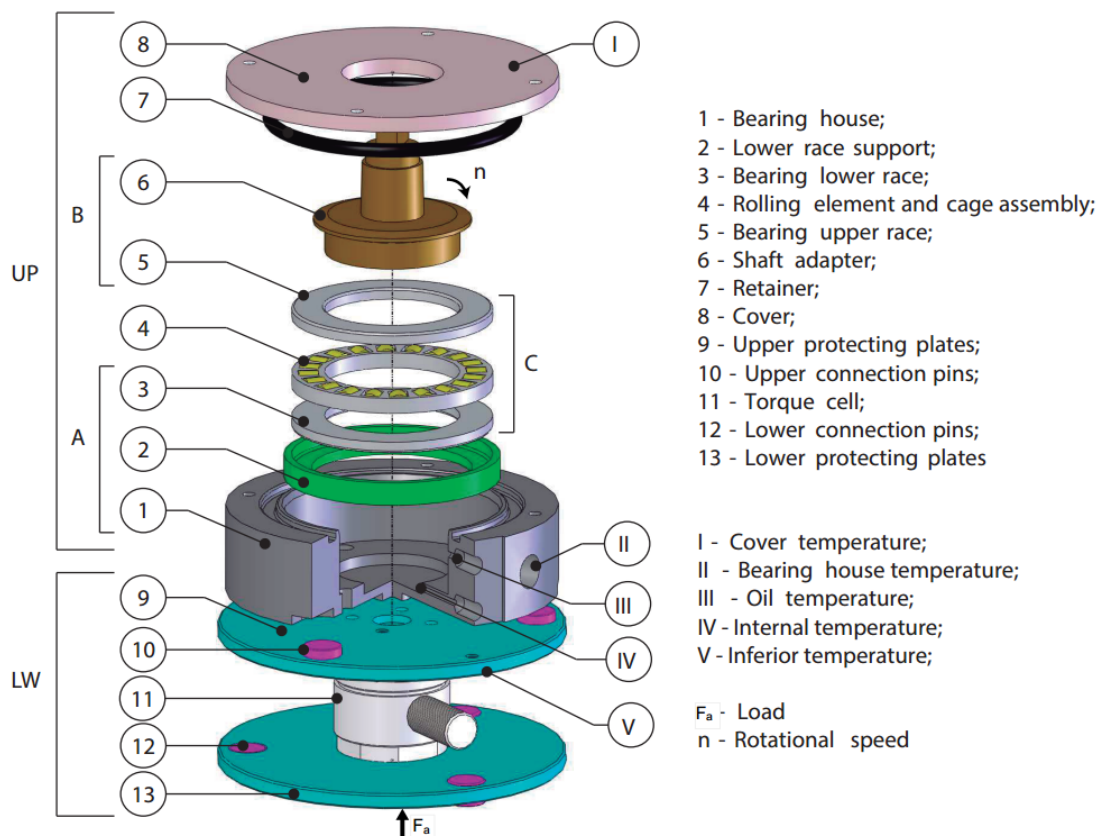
Schematic view of the rolling bearing assembly [21].
